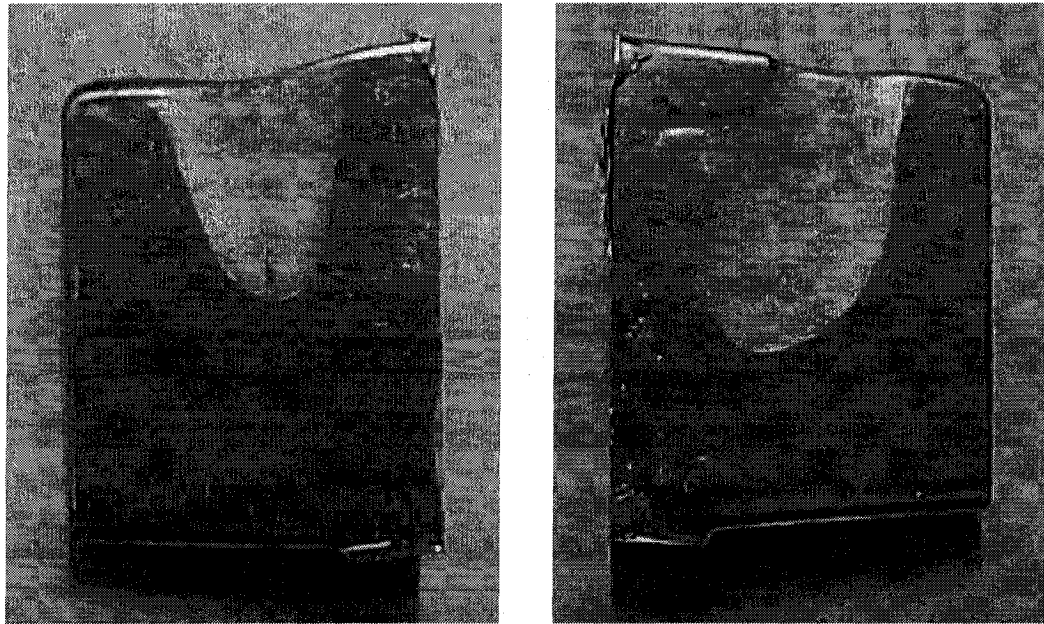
Aluminum casting produced without heat pipe cooling (H2)
